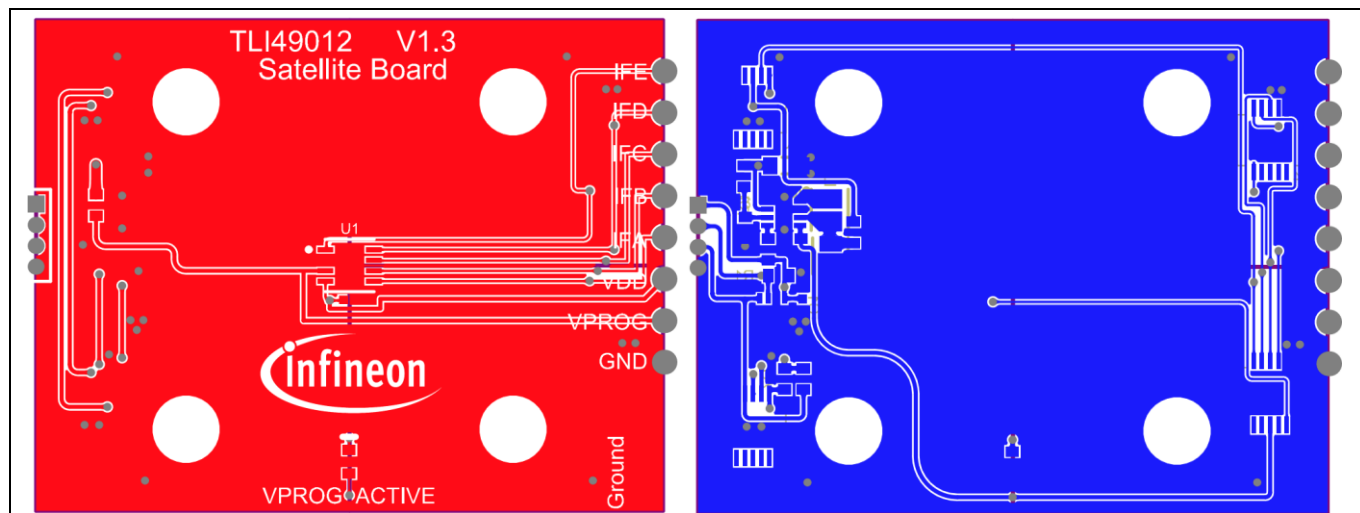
TLx49012 satellite board PCB layout – Top (left), bottom (right)
